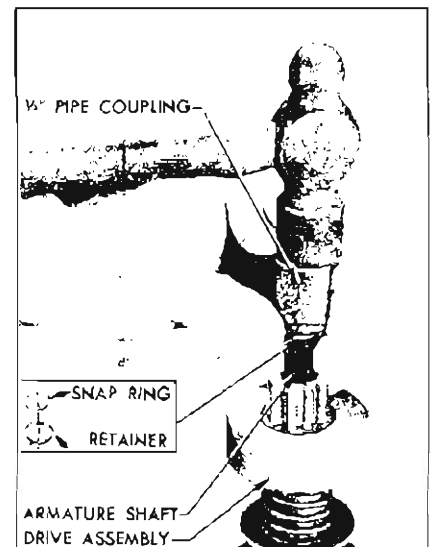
Removing Pinion Stop Retainer and Snap Ring
